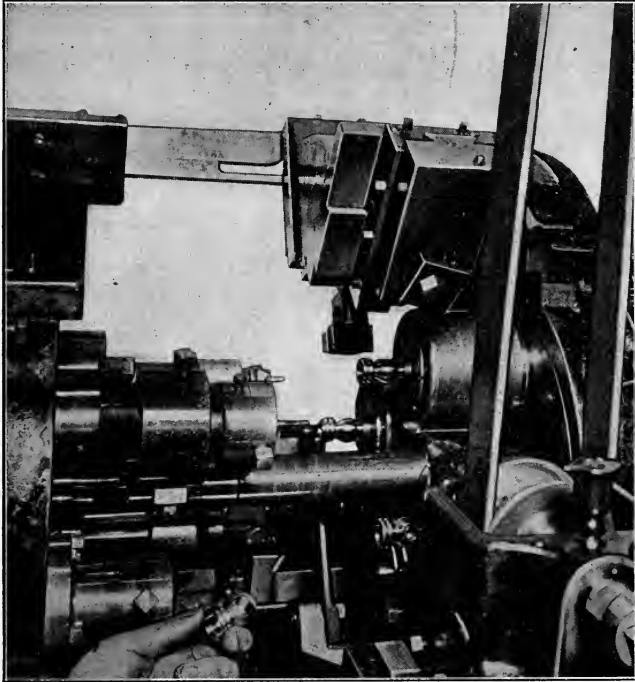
Example of Cross-drilling on the "Acme" Multiple-spindle Automatic Screw Machine
